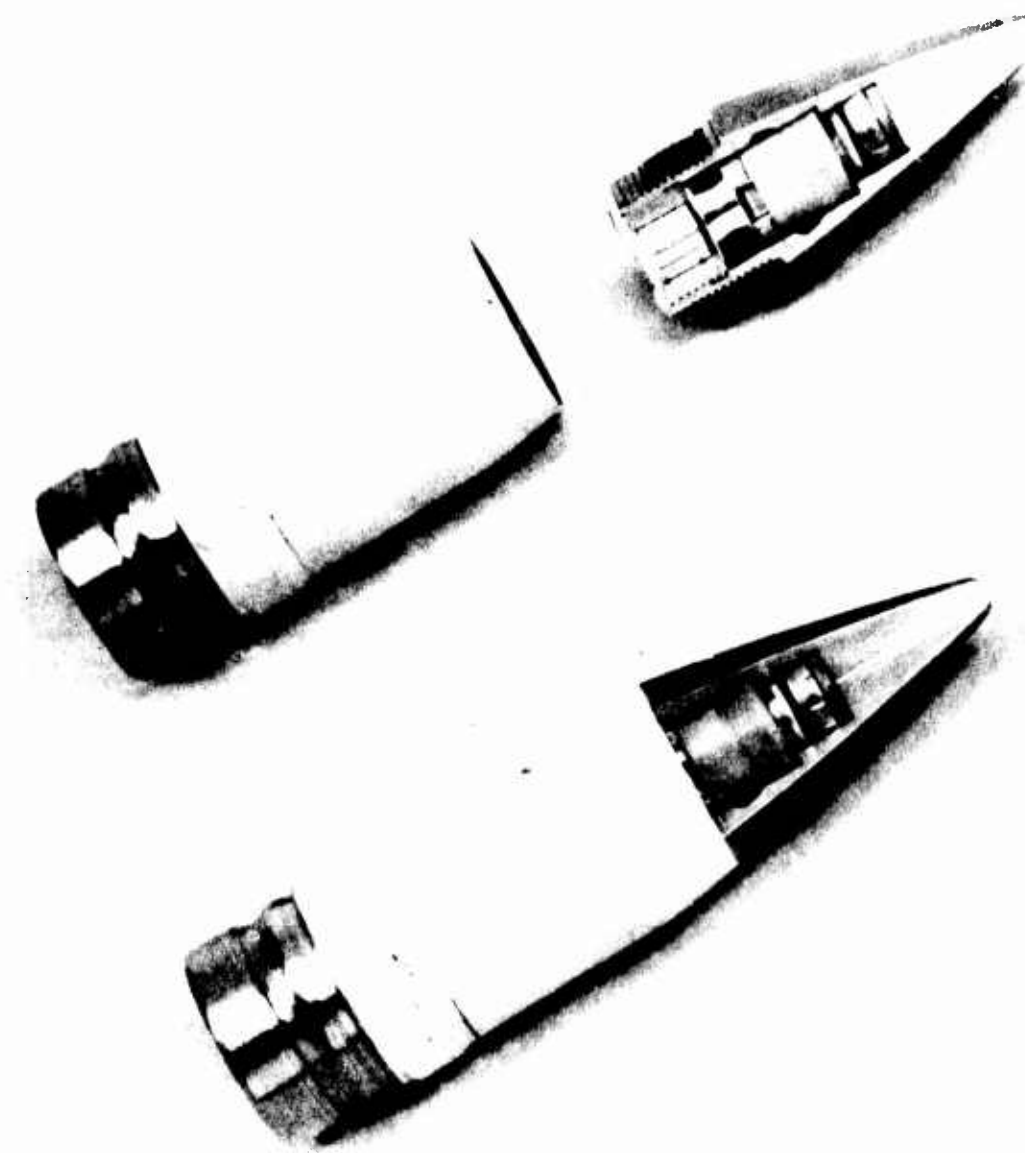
Test Vehicle Projectile Assembly Cutaway View
